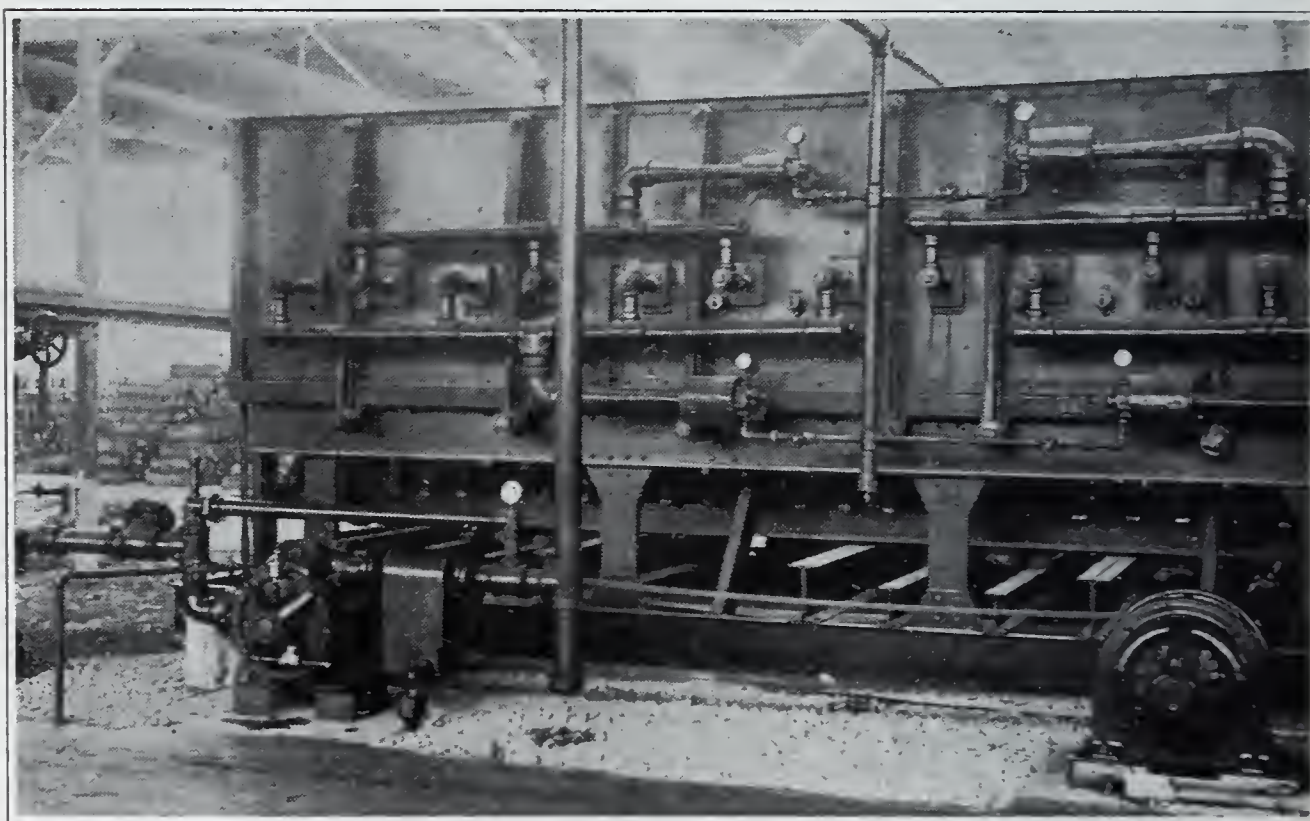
Automatic Surface Combustion Shell-Drawing Furnace.
